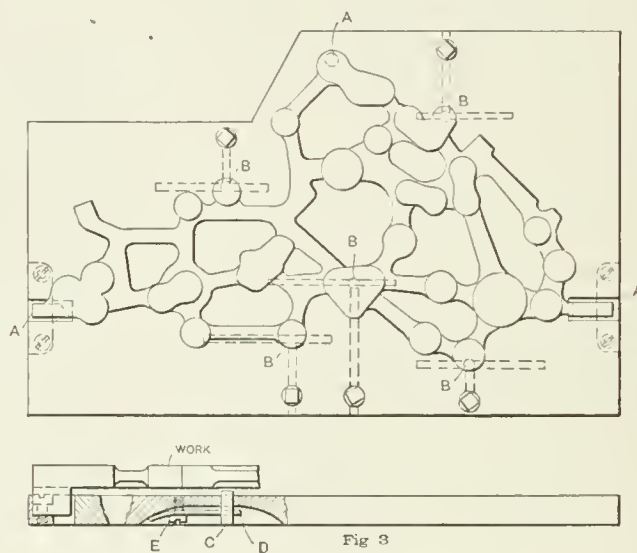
and 3. Fixture used in Finishing One Side of One Side Frame only, One Fixture of this Kind being used for Each Side Frame
